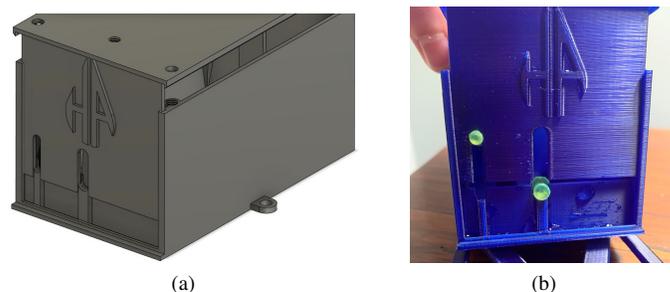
(a) A secondary interior wall and external overhangs overlap with attaching sections to prevent water from being introduced. (b) Opening capsule shows moisture behind slide-in wall having been stopped by the protective wall.
